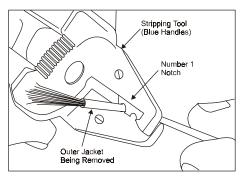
Stripping Outer Jacket of Single Fiber Cable
